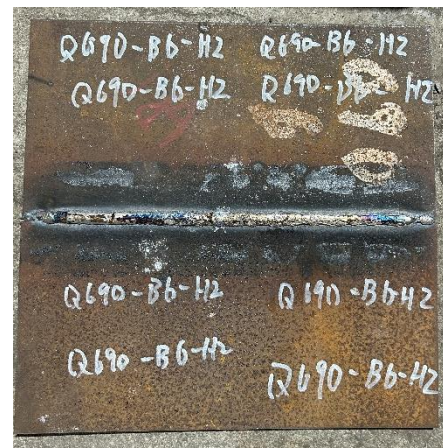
Butt-welded tensile coupon configurations (mm)
